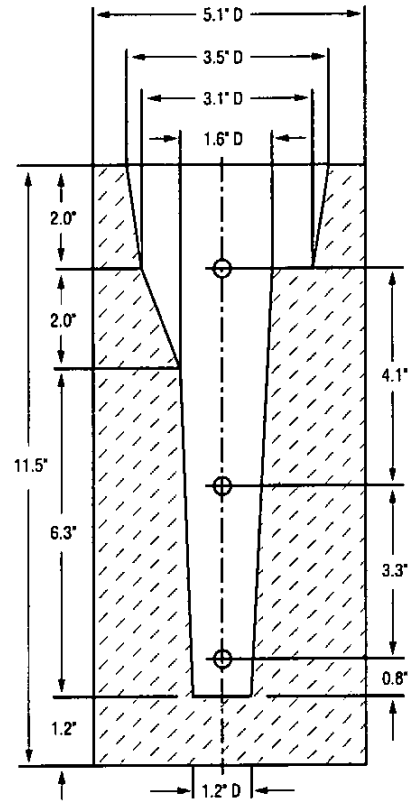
Configuration of CO₂ sand mold for casting cantilever specimens tested in rotating bending fatigue in Ono- and Krause-type machines (Ref. 56)
